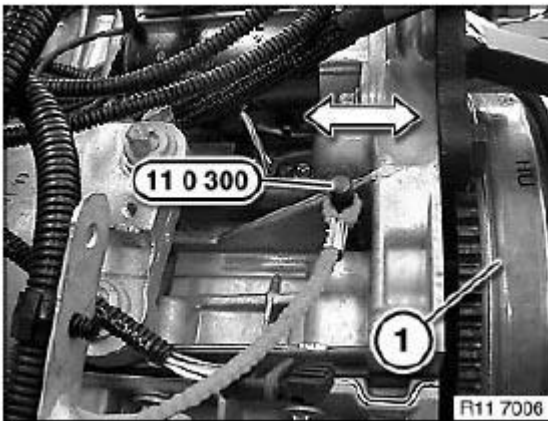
Identifying Flywheel And Special Tool 11 0 300
